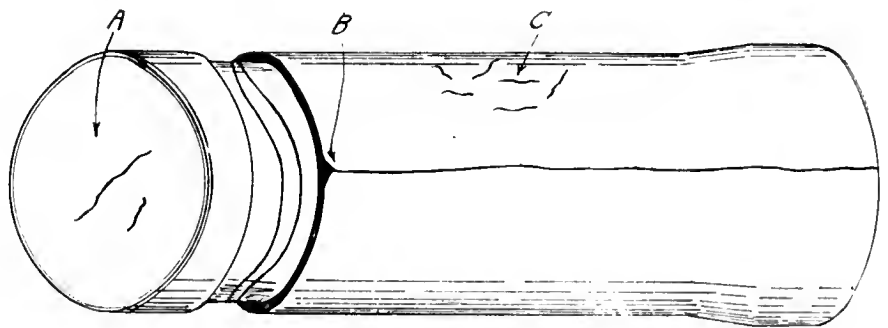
DEFECTS IN SHELL FORGINGS.
